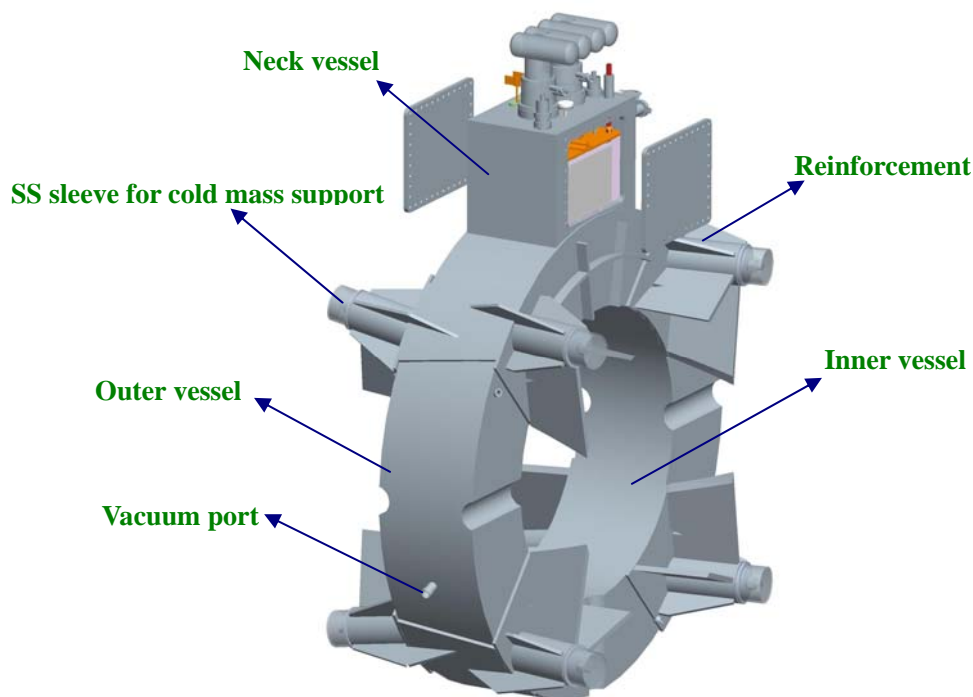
A 3D view of MICE coupling magnet vacuum vessel
